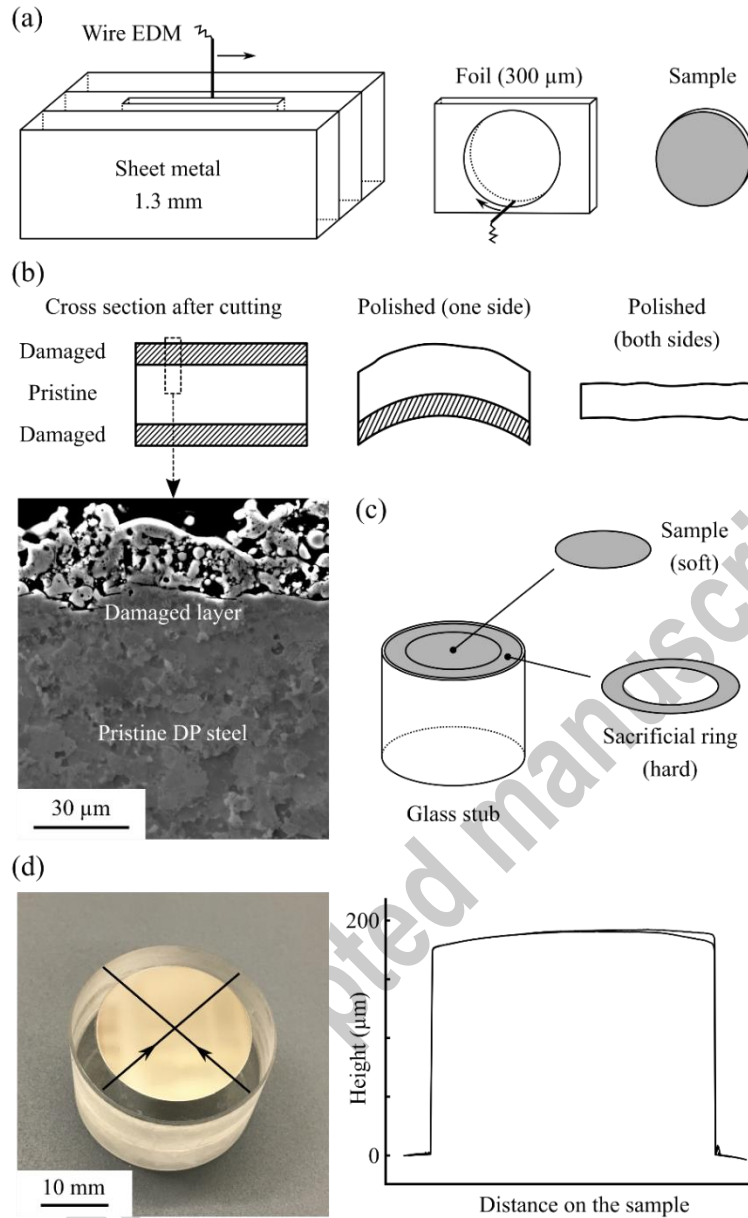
Overview of the thinning process used to prepare polished samples from DP steel sheets. (a) Wire electrical discharge machining is used to extract 300 μm -thick disks from commercial sheet metal. (b) Schematic view of a disk cross-section at different stages of polishing. Damaged surface layers inherited from the cutting step are present initially as shown in inset (SE image). Thickness inhomogeneity and slight shape waviness results from the two-step polishing process. (c) Illustration of the experimental configuration used for automated polishing. (d) Profilometry measurements used to check the performance of the gluing process. The optical image shows a sample glued on a glass stub and polished on one side. Sacrificial rings were not used here to keep the glass surface as a reference. The profile measurements shown on the right were carried out along the two black lines.
